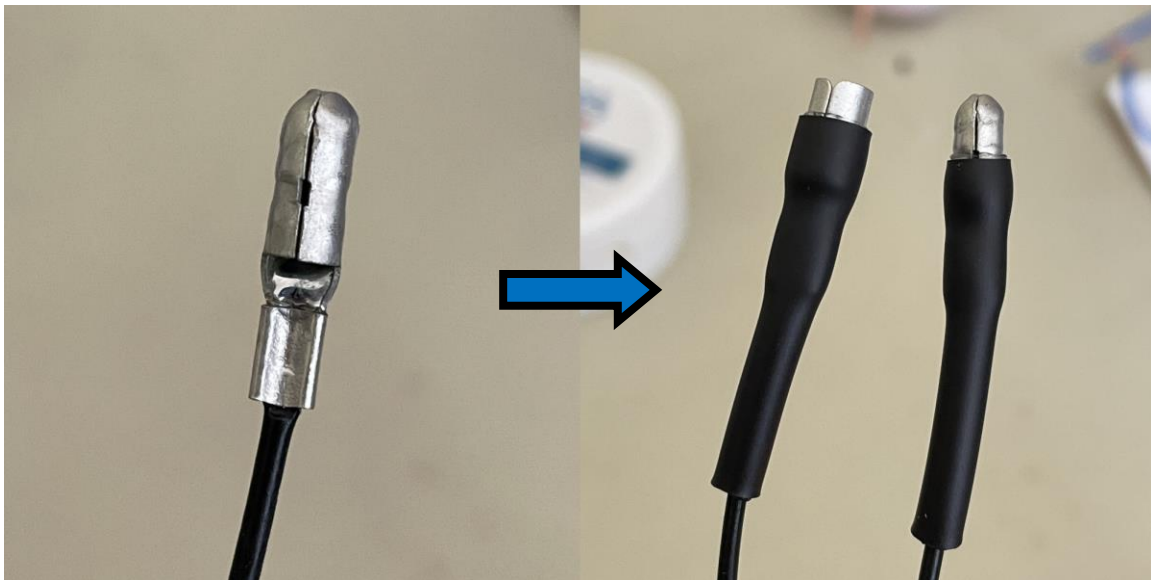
At left, a properly crimped and soldered bullet connector. At right, the completed bullet terminals with adhesive-lined heat shrink strain relief. Leaving a small portion of the female bullet connector exposed makes inserting and removing the male connector easier.
